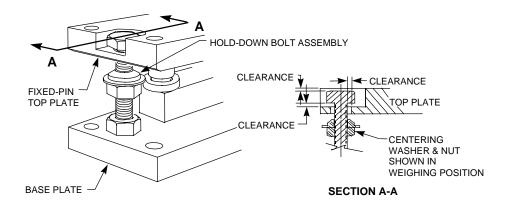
FLEXMOUNT Hold-Down Bolt Assembly
